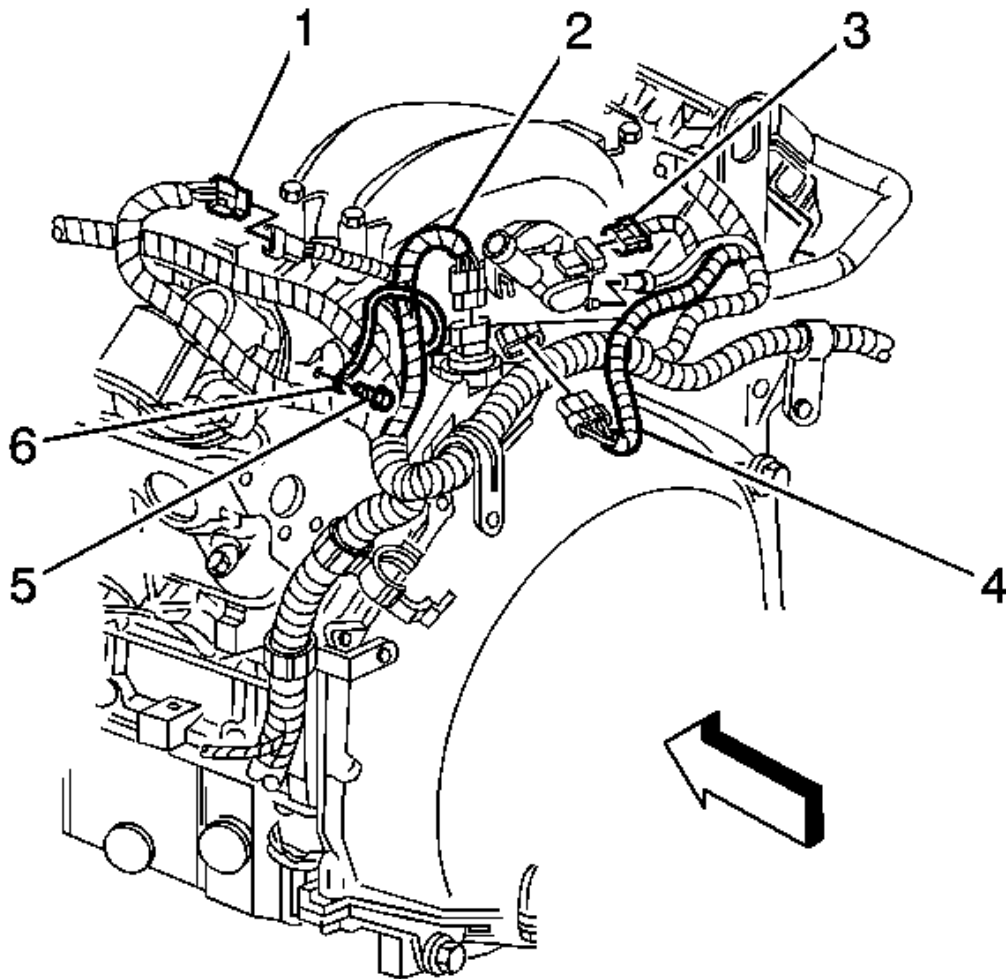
View Of Harnesses & Connectors At Top & Rear Of Engine
